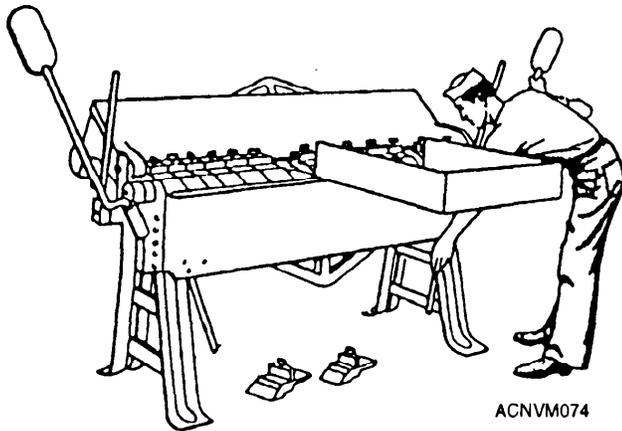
Finger brake being used to form box (note fingers removed).
